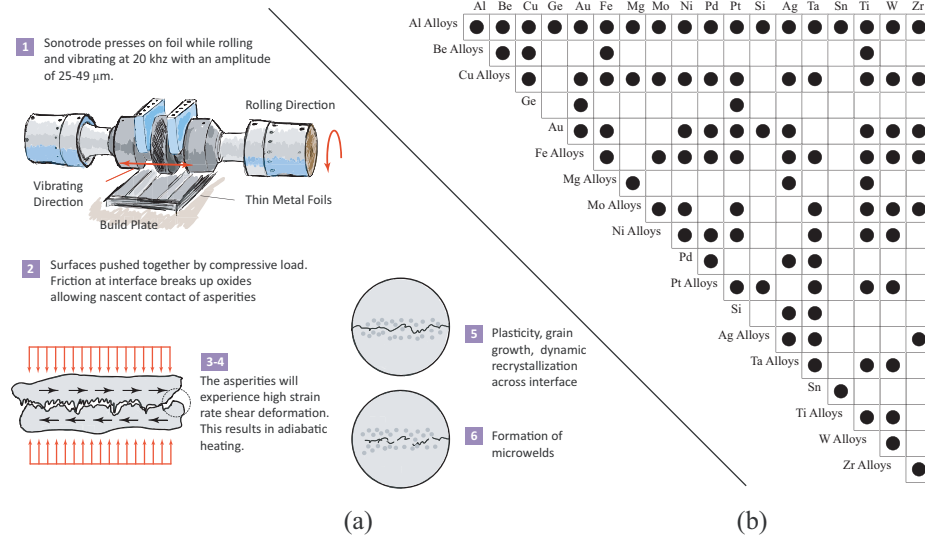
(a) Overview of ultrasonic additive manufacturing process, and (b) metal combinations that can be ultrasonically welded [3]
